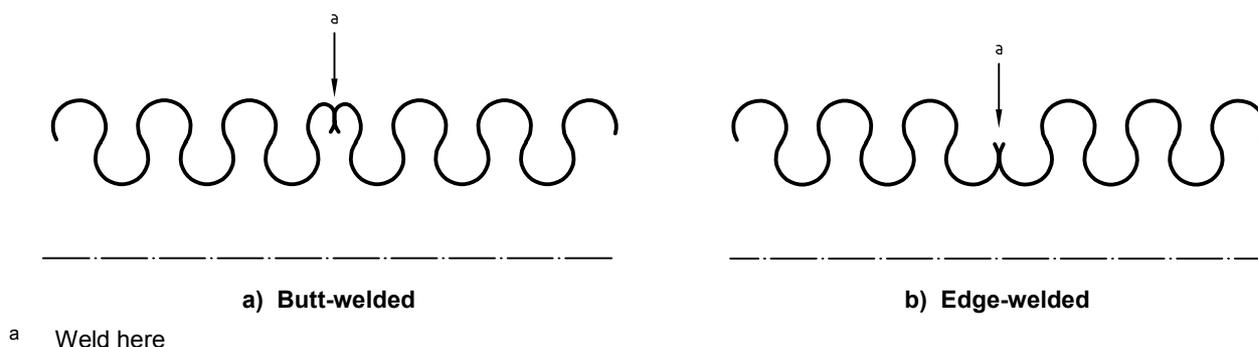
Details of butt-welded and edge-welded hose joints
